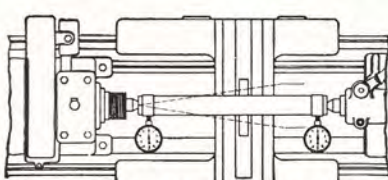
Testing Alignment of Tailstock Spindle with Headstock Spindle.
